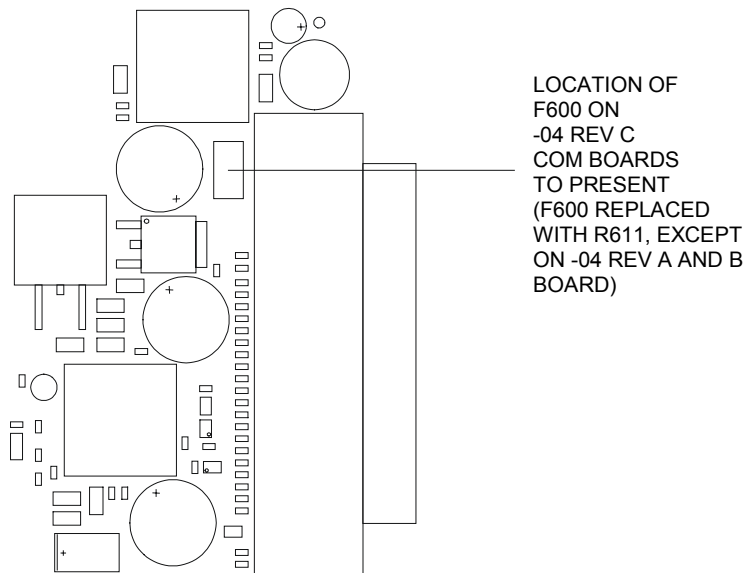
Com Board Fuse Location/F600 (Replaced by R611)
